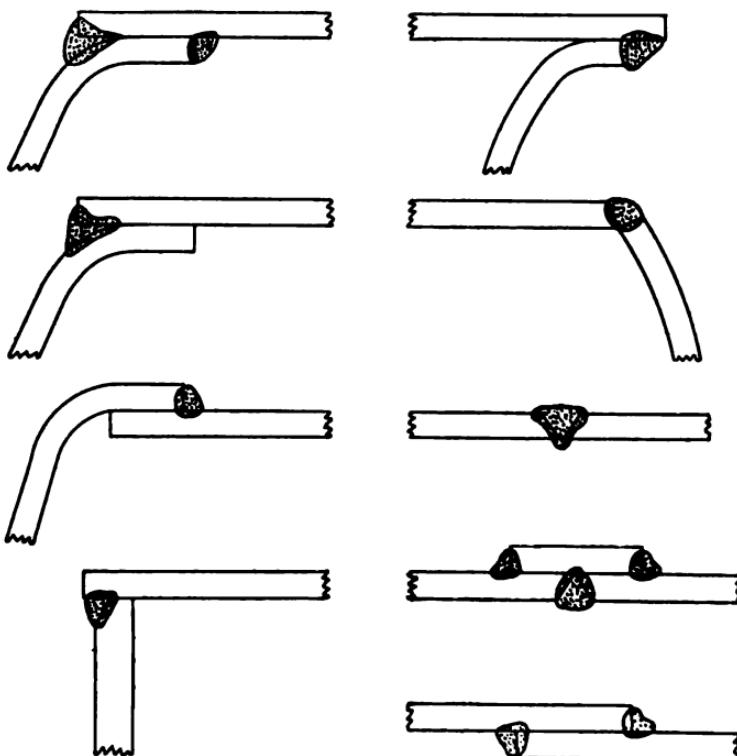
Methods of Making Welded Seams in Tanks
